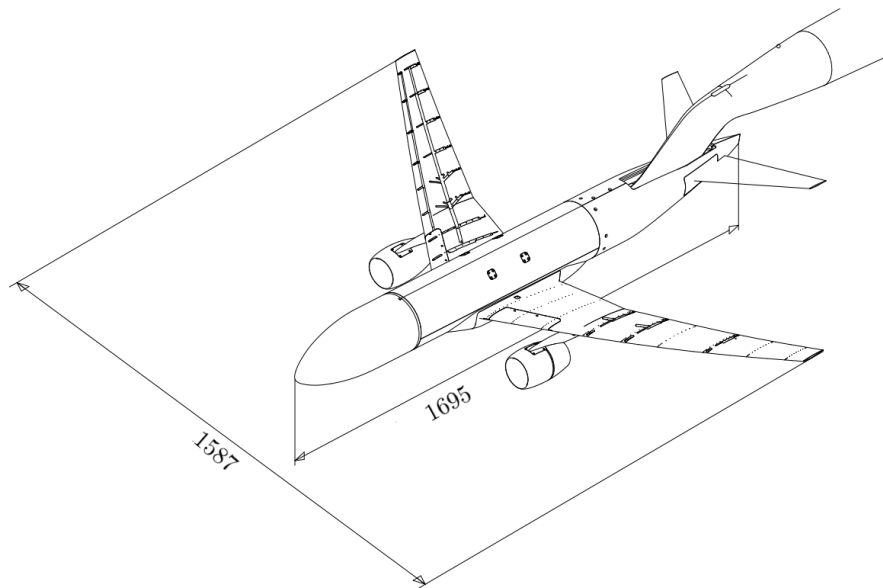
Schematic isometric view drawing of the NASA CRM including its main dimensions in mm. [32, p. 16]
